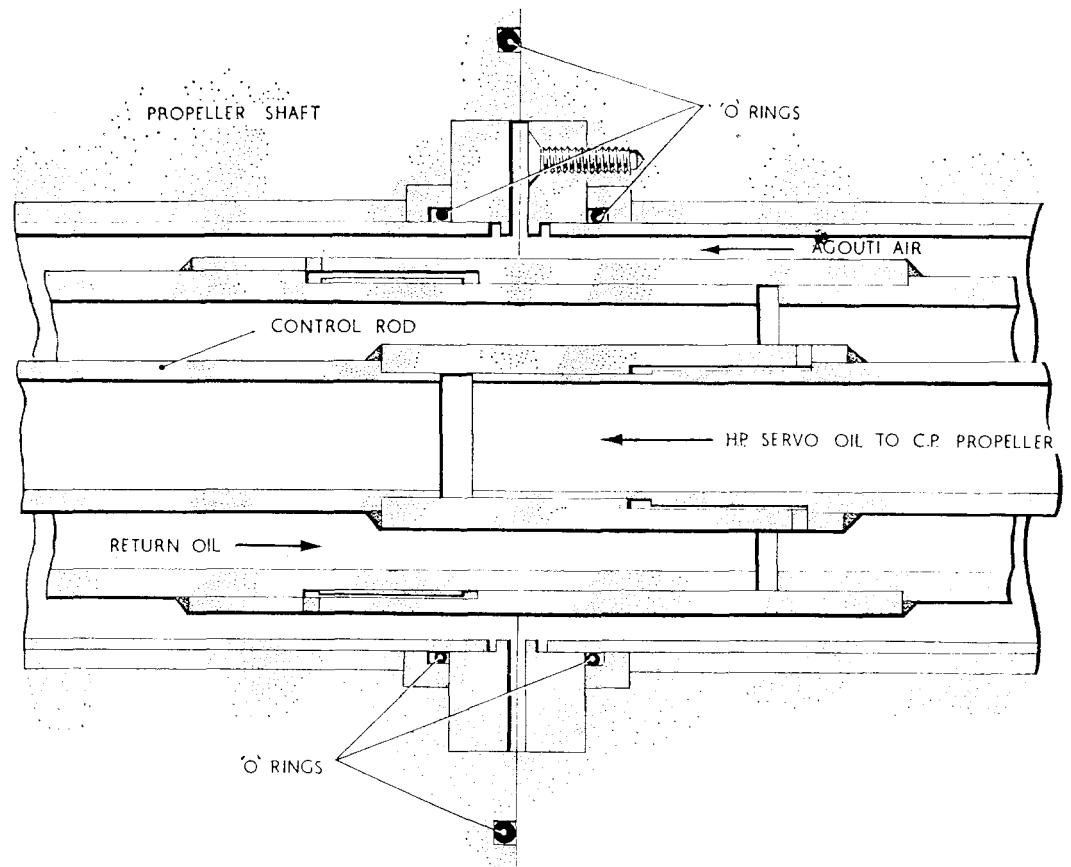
CROSS-SECTION OF PROPELLER SHAFTING SHOWING JOINING OF CONTROL ROD, RETURN OIL AND AGOUTI AIR TUBES
